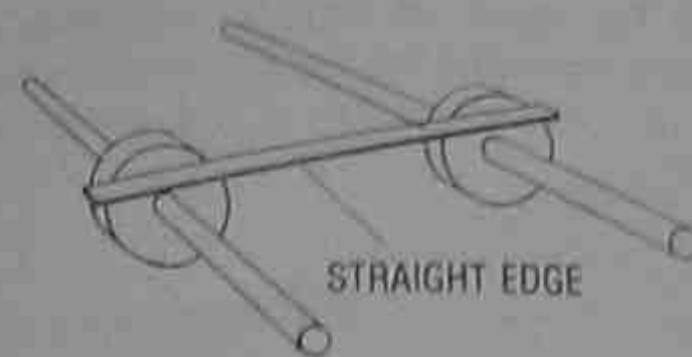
Pulleys brought into line using a straight edge across the faces.
